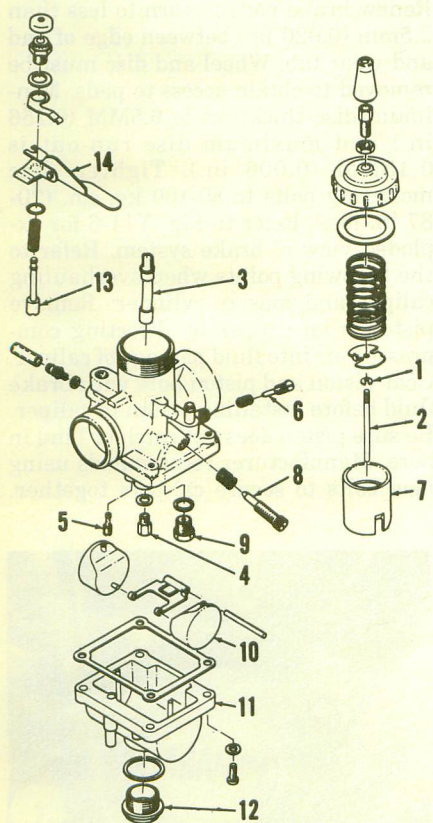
Exploded view of typical Mikuni carburetor used on all models.
